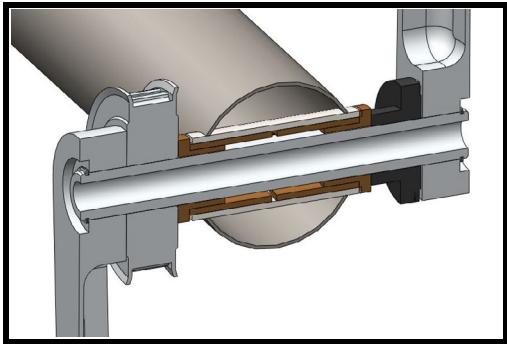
Front crank axle using snap rings, hex shaft, and bushings
